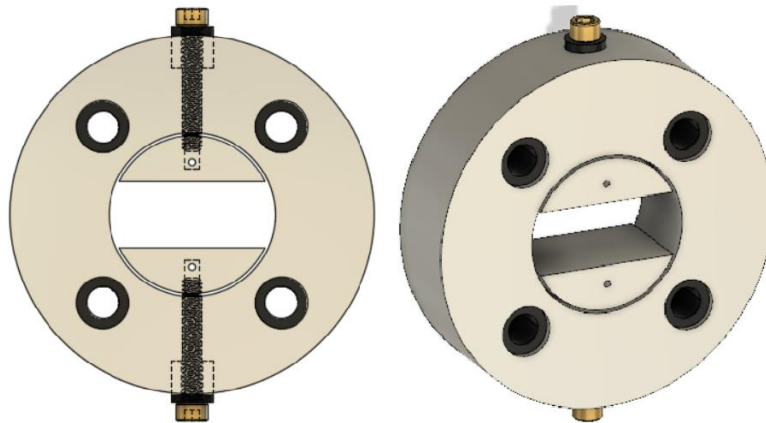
Deflection Assembly. The figure above depicts a deflection assembly. The deflection plates are secured, or pulled tight to, the centering ring by the socket screws. Teflon sheets are sandwiched between plates and the ring to insulate the ring from the potentials applied to the plates. To apply a potential to each plate, an electrical lead is secured to the head of the socket screw that is screwed into the plate. The outer edge of the ring is isolated from the socket screws by ceramic spacers that are used to center the socket screw in a larger diameter hole and space the head of the screw away from the outer edge of the ring.
